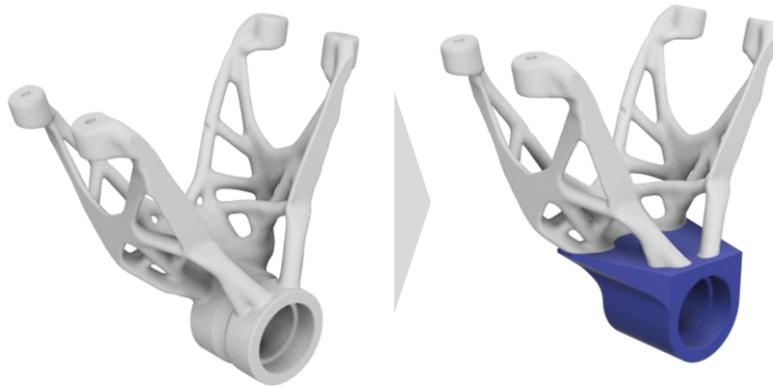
Separation of the steering shaft bracket into a milled part (blue) and an additively manufactured part.
